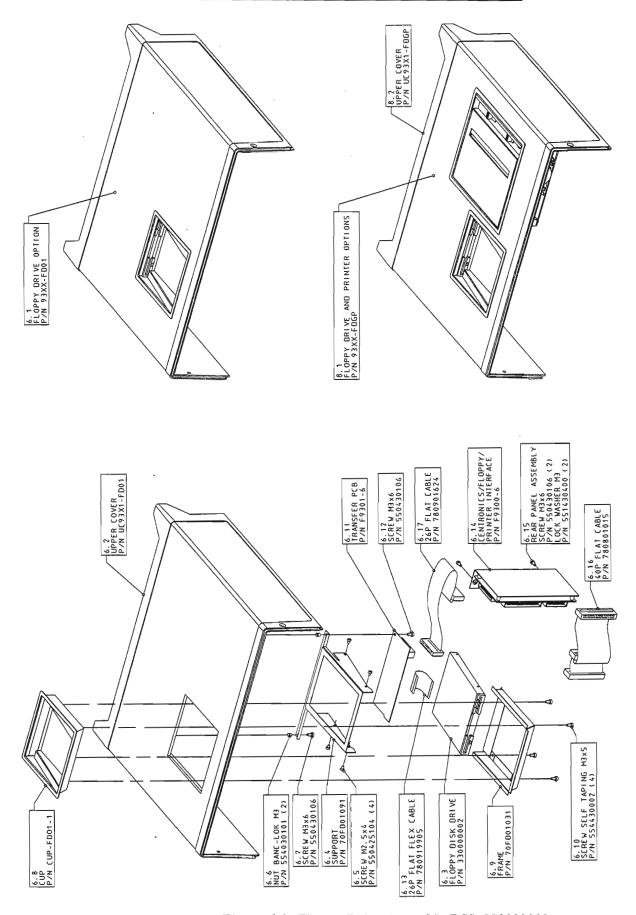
Floppy Drive Assembly P/N: 330000002
